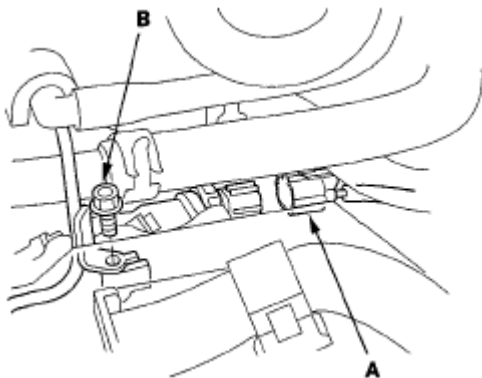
Identifying 2nd Clutch Transmission Fluid Pressure Switch Connector And Vacuum Line Bolt
